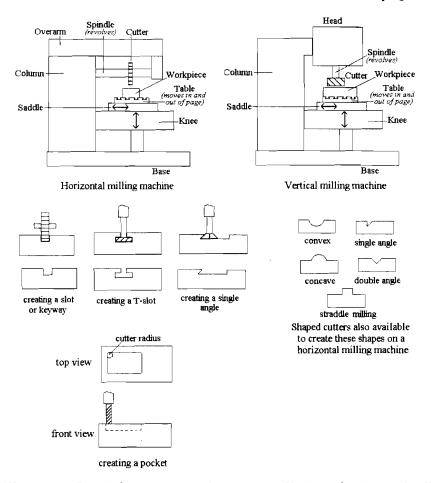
Principal components and movements of horizontal and vertical milling machines and the basic operations that can be performed on them.
